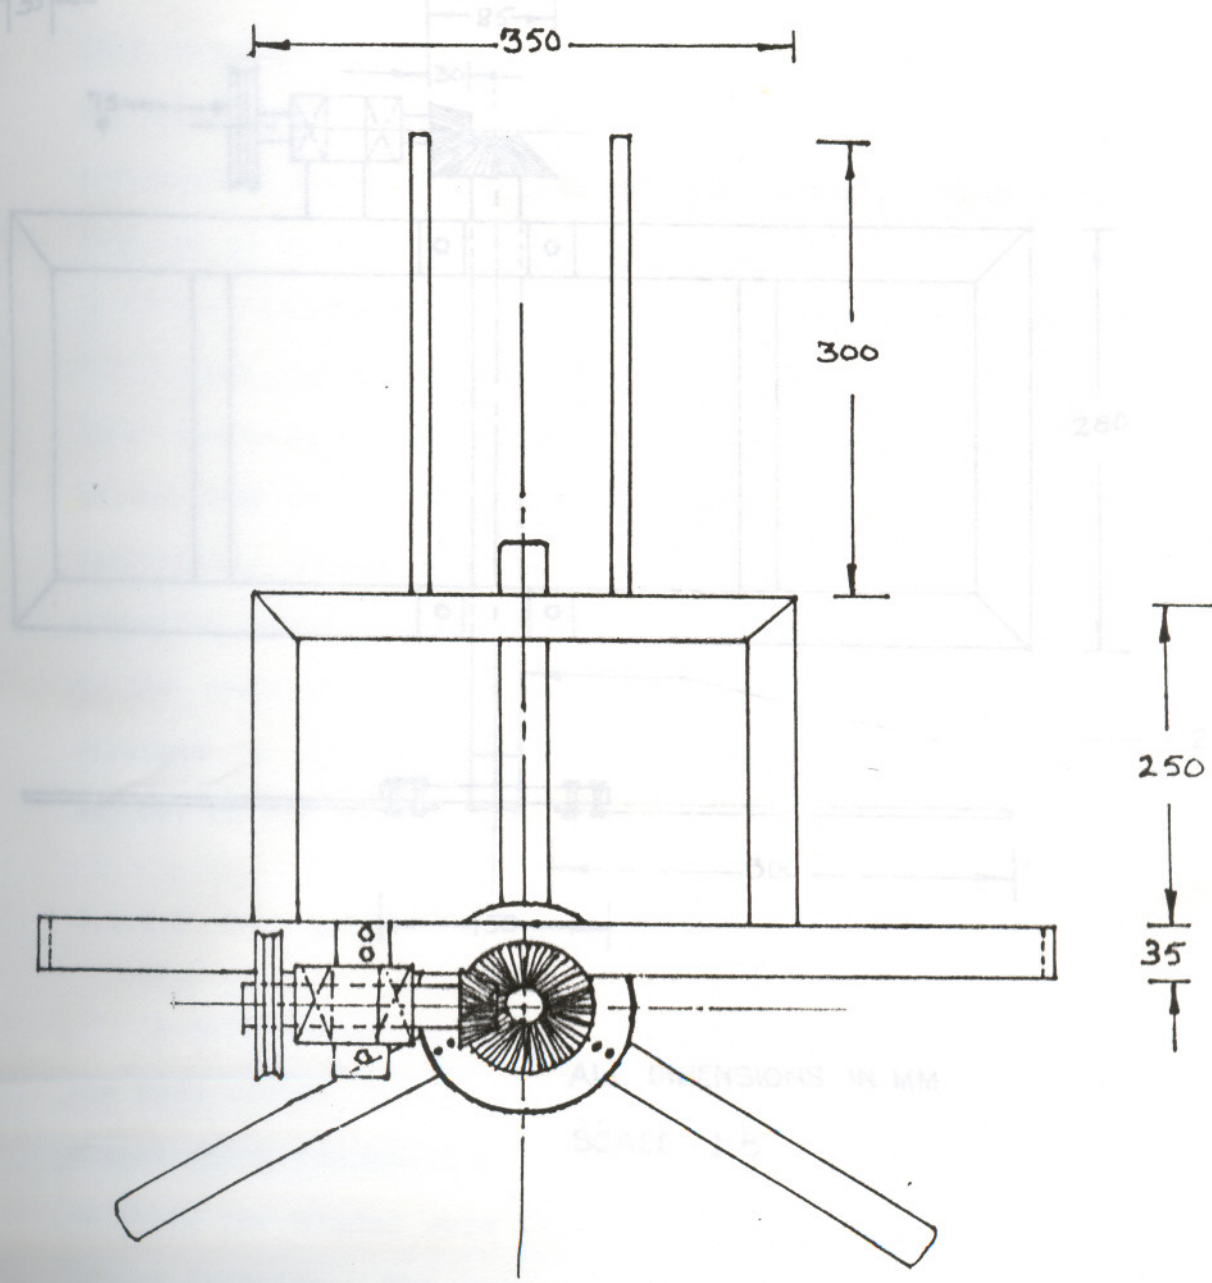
(b) FRONT VIEW OF THE BUSH CUTTER
